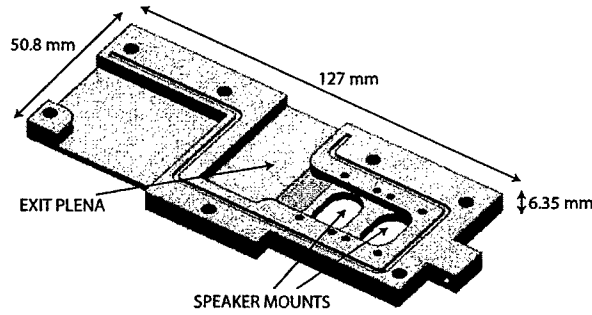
CAD drawing of the design of the actuator speaker mounting plates.
